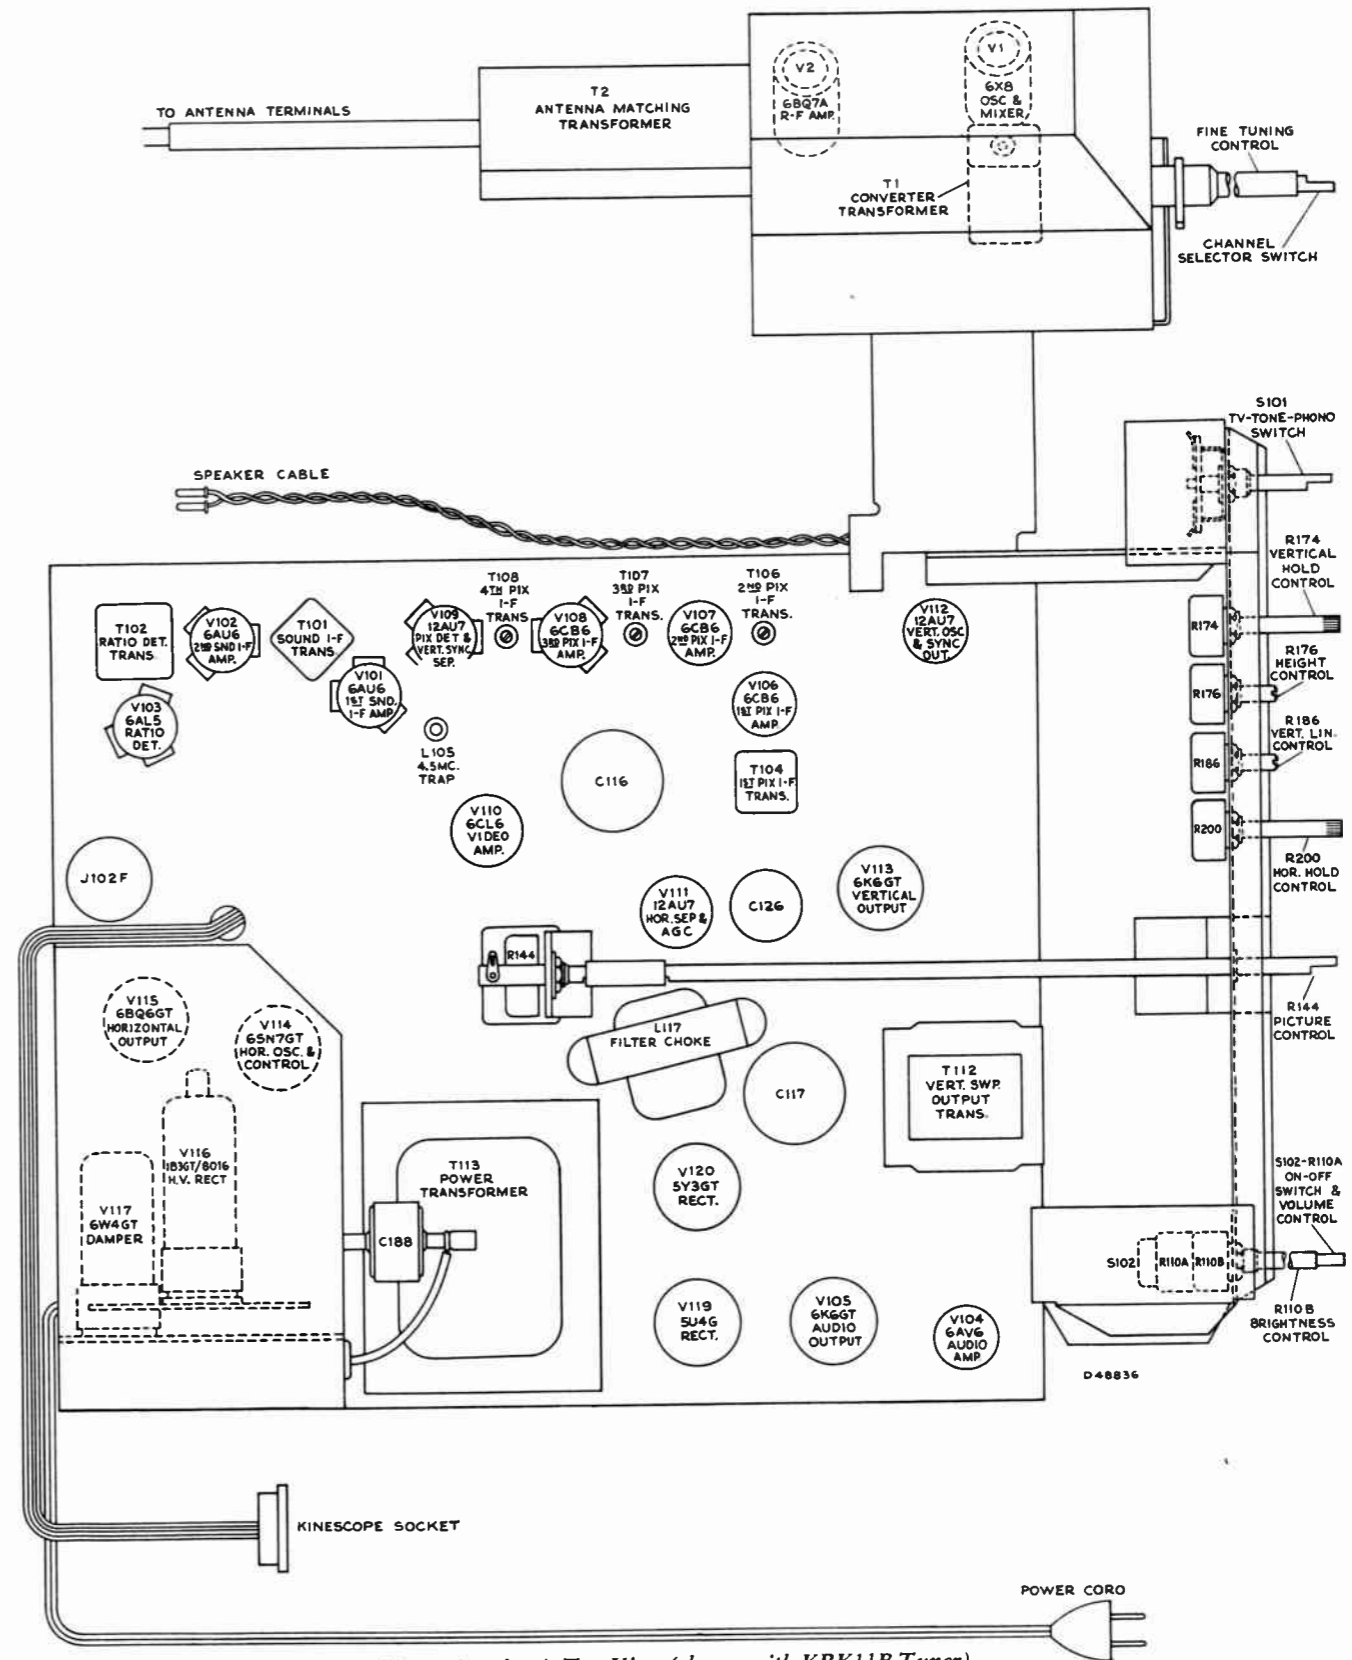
Chassis Top View (shown with KRK11B Tuner)
